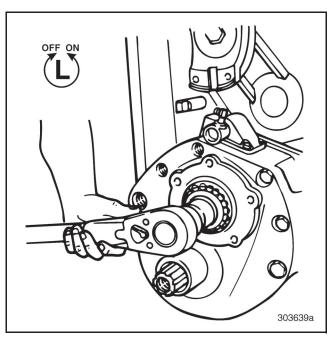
Removing Front-Drive Shaft Bearing Clamp
